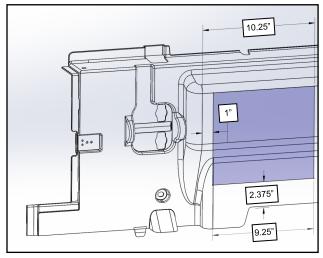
(Rework Rear Seat Cover, Cut)
